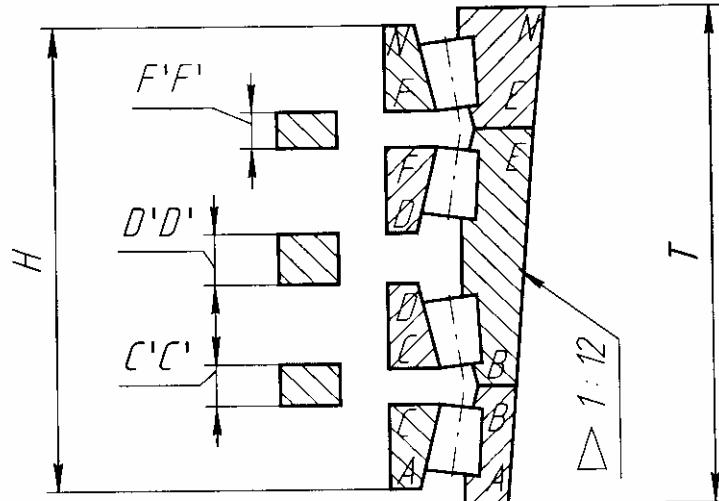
Installation of bearing components with a tapered bore into a pillow.
